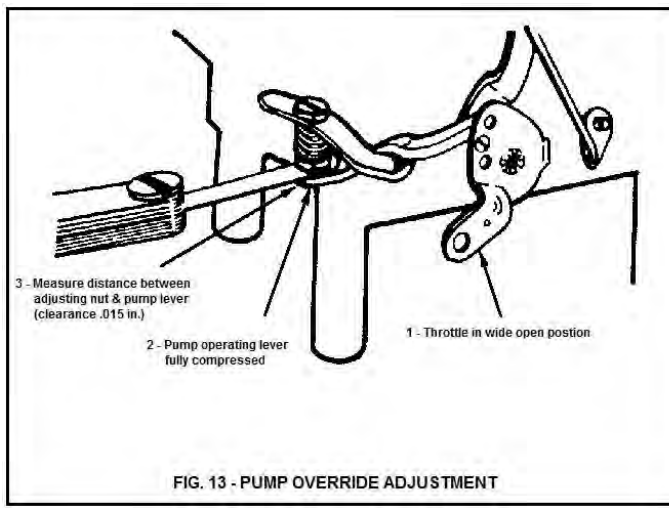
PUMP OVERRIDE ADJUSTMENT
